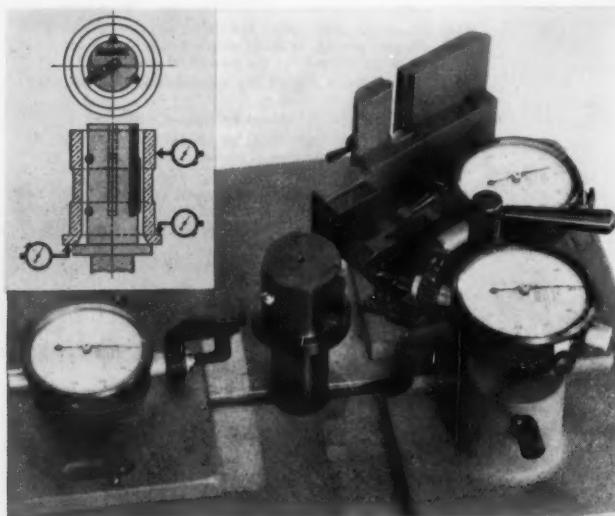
Another often used positioning mechanism — the spring-loaded mandrel—is shown in this illustration.
